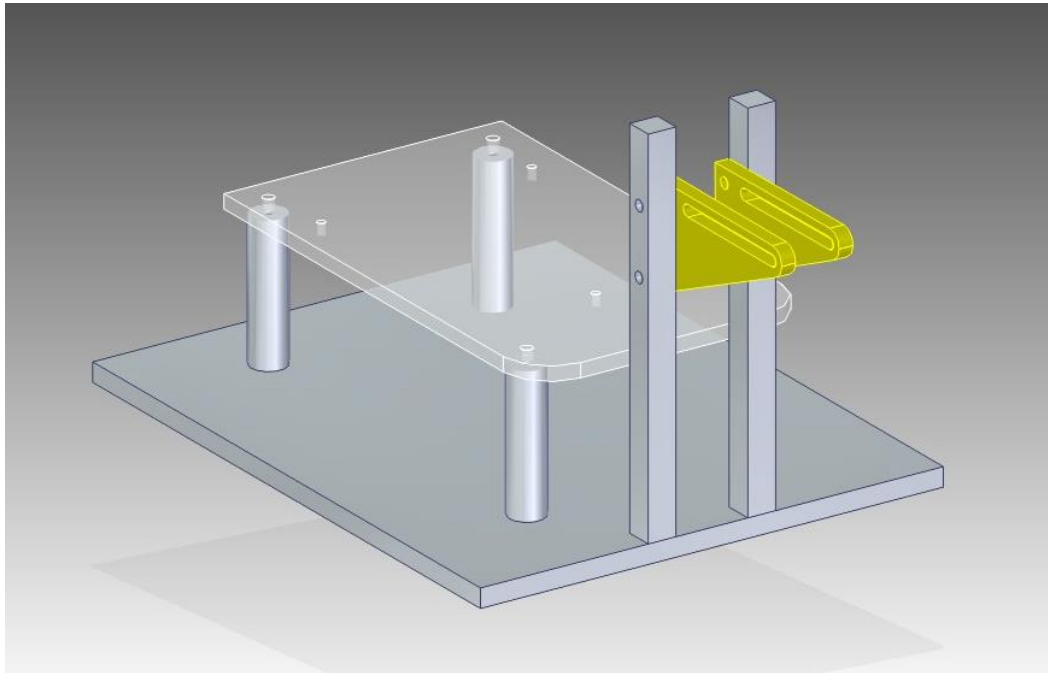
CAD assembly of the robot stand and a holding fixture for Link 2
